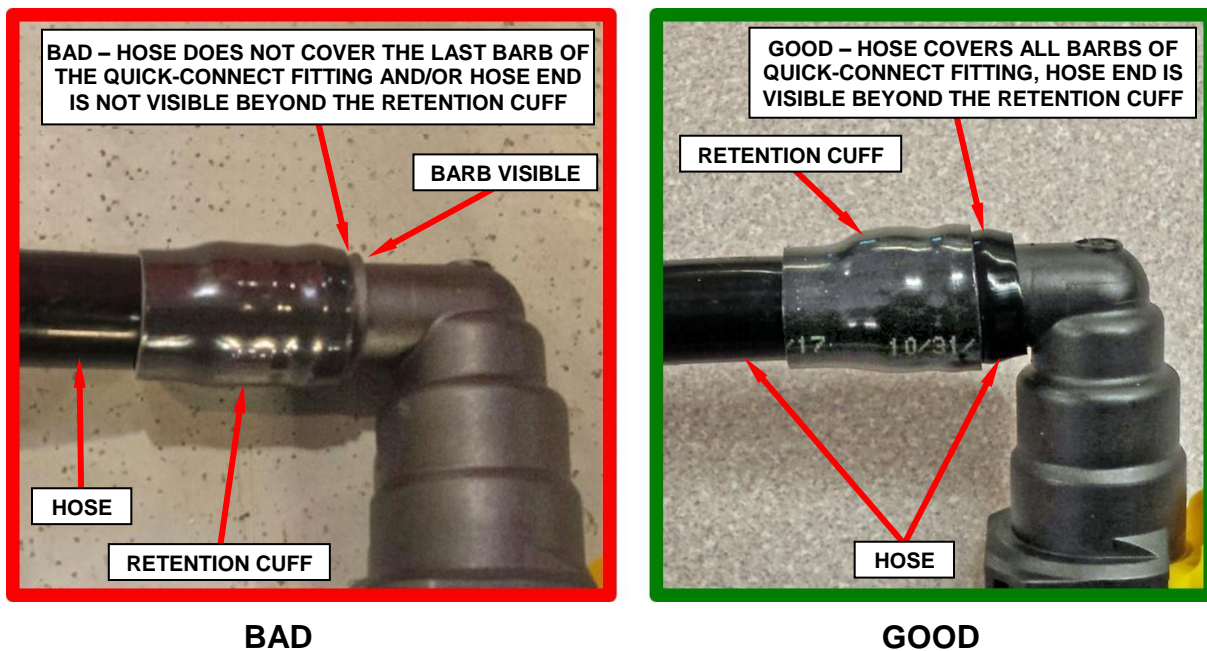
Fuel Supply Jumper Tube – Inspect Hose Connection
